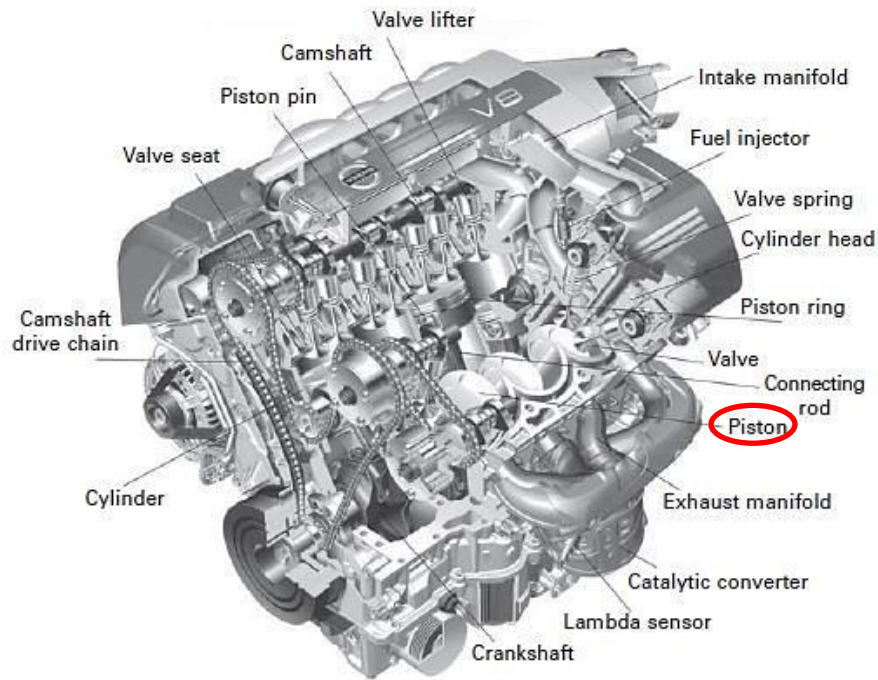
Cutaway of four-stroke cycle diesel engine with various parts indicated. [1]
